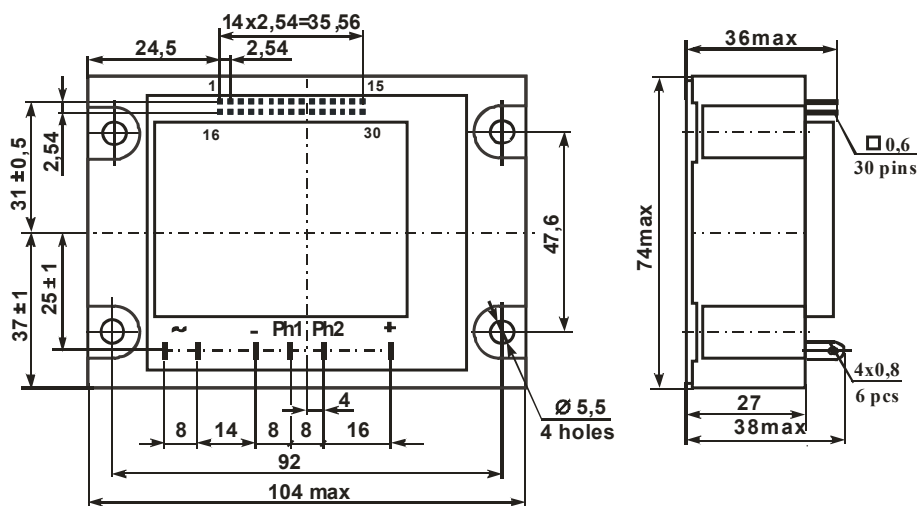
Overall dimensions of BDCDMM-5,10-1,2,6 power assembly type «3»
